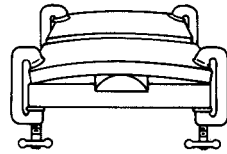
Prebending parts before welding to use shrinkage force.
